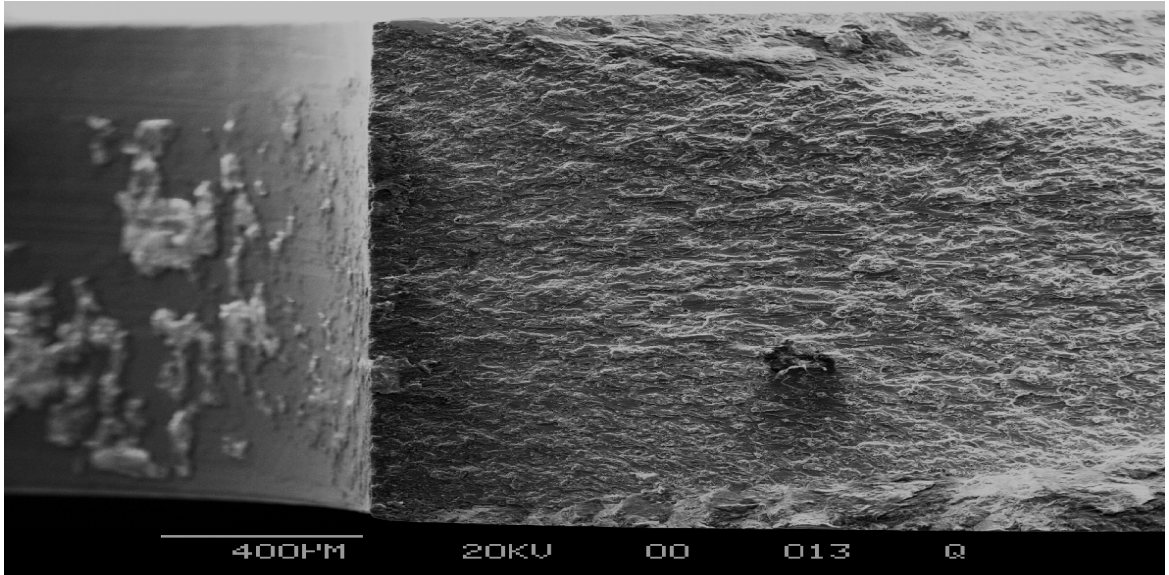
Fracture surface of specimen 6 near the hole to view the initial crack.
